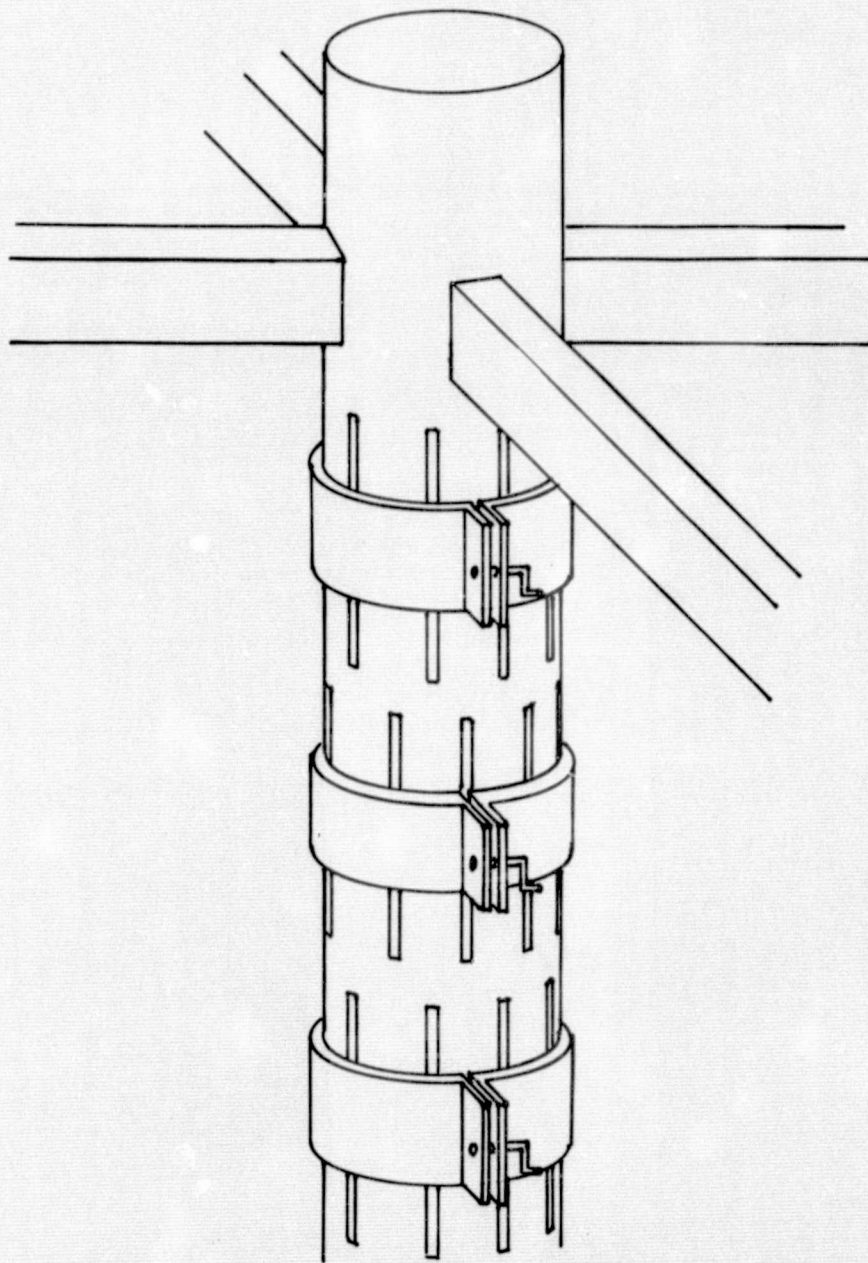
Collet-Type Locking Arrangement for the Tubular Mount
